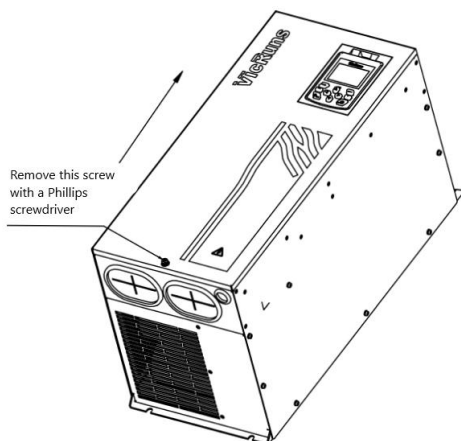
Schematic diagram of disassembly and assembly of the sheet-metal shell cover
